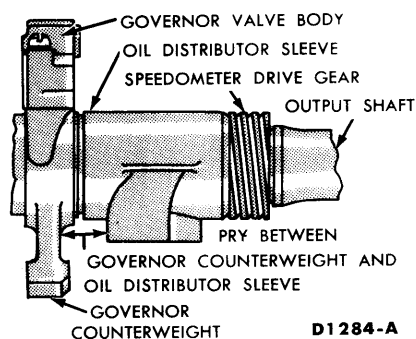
Pressure Apply Area for Removing Speedometer Gear
